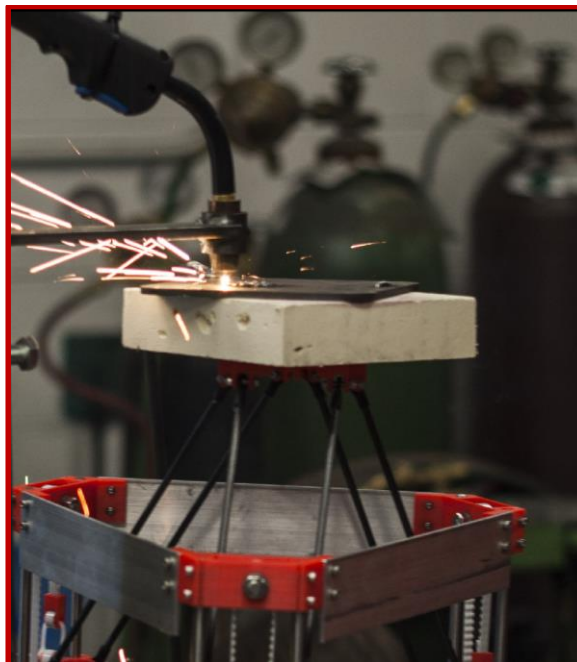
MIG welding using a metal 3D printer [1-8]
